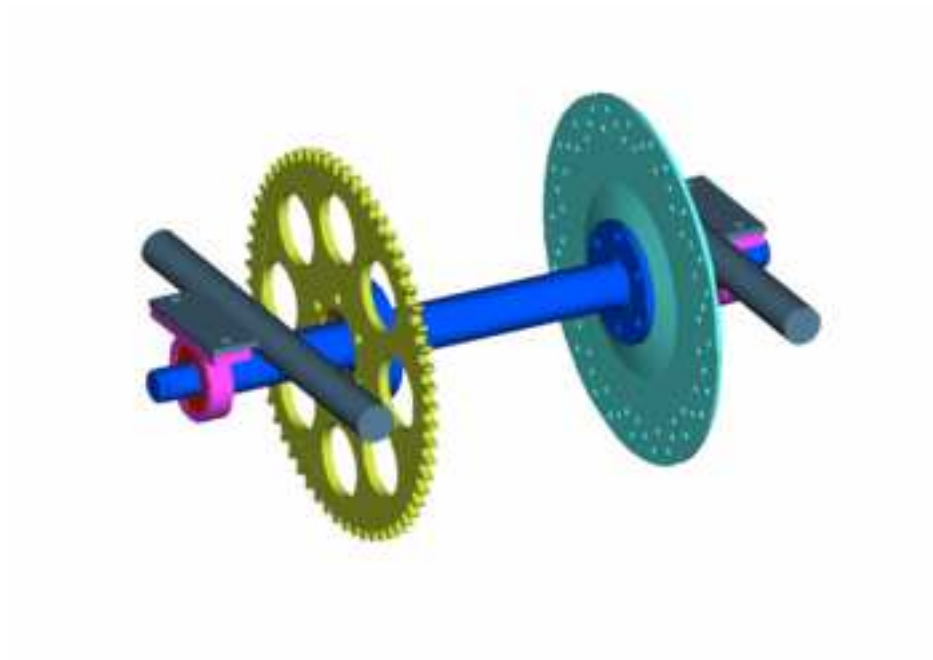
Current drivetrain assembly with spaceframe positioning.
